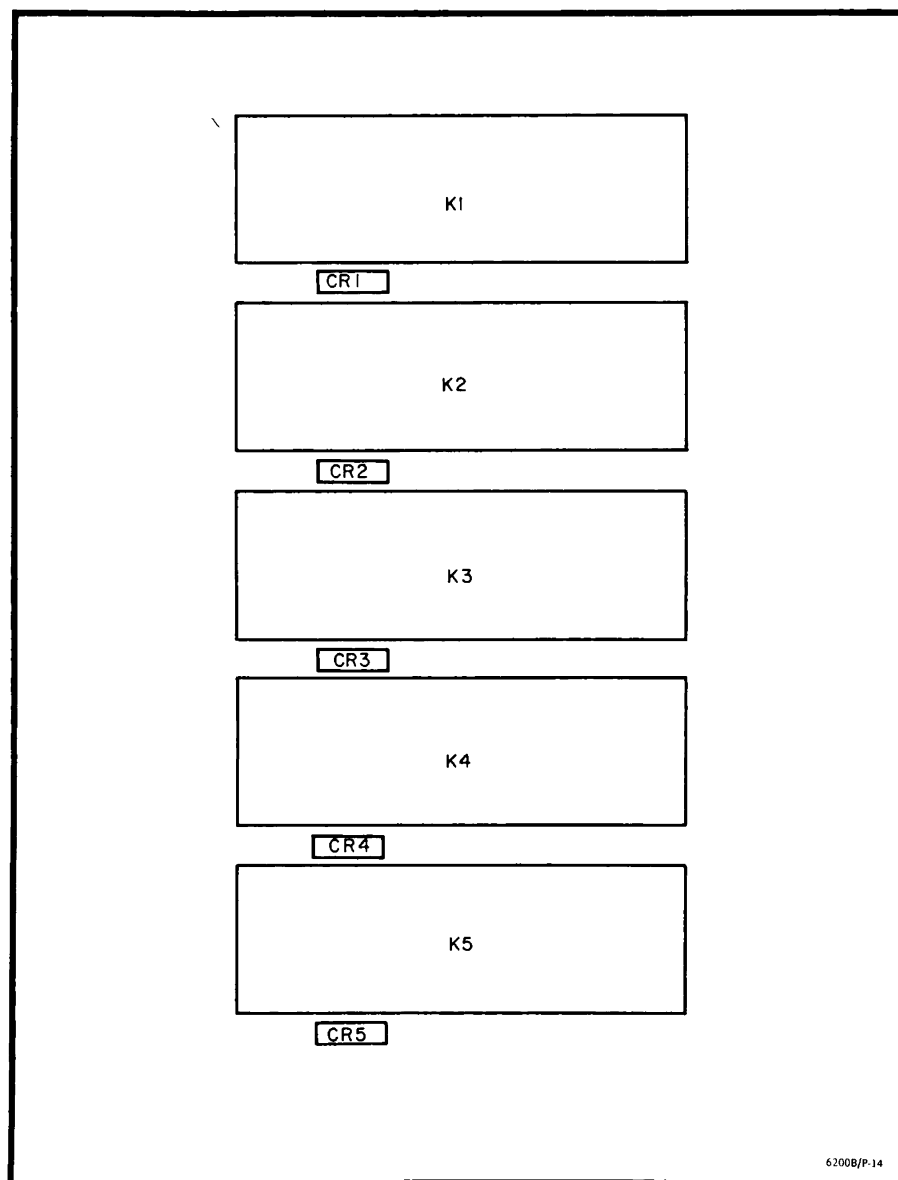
Component Location, Collector Programming Relay Assembly A18
